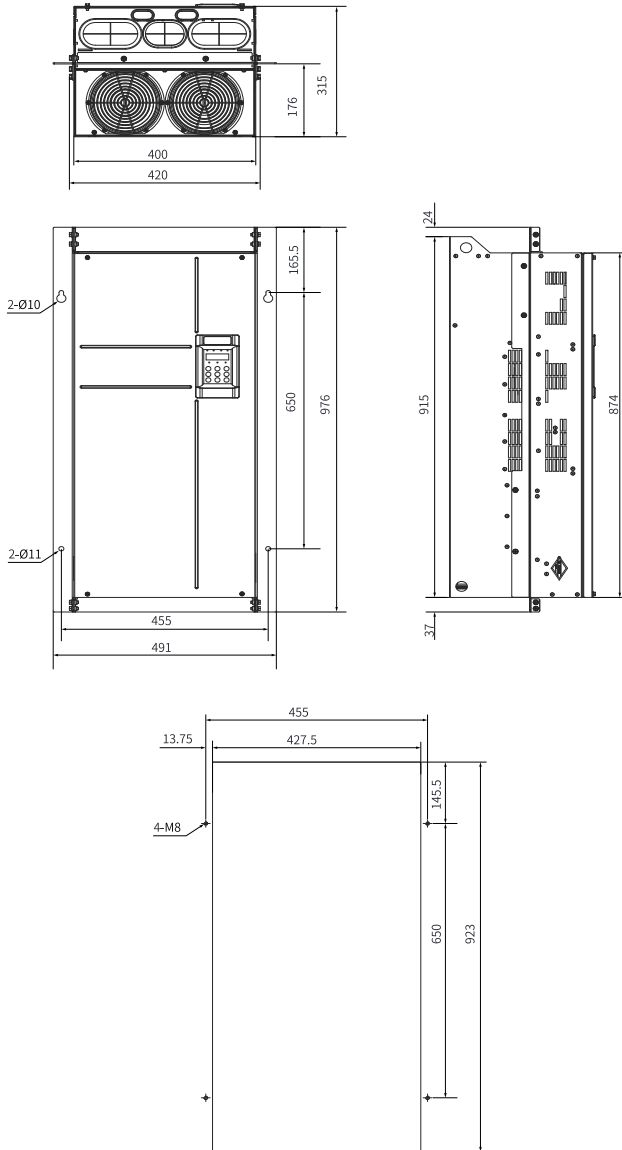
Dimensions of the MD500-AZJ-A1T9 bracket and mounting hole
